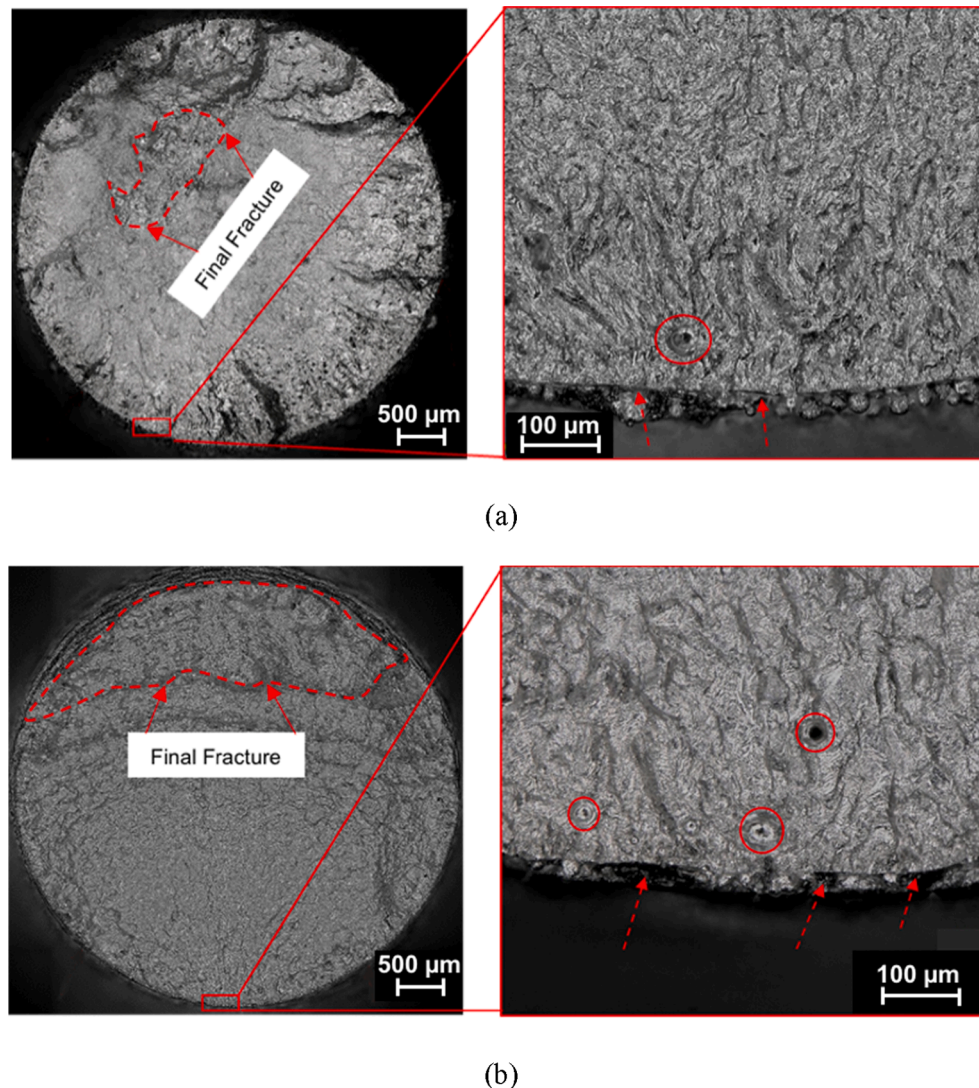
Fracture surfaces of specimens in as-built (AB) surface condition subjected to (a) R-B loading with $2N_f = 250,800$ reversals and (b) axial loading with $2N_f = 44,390$ reversals. Both specimens were fabricated using Machine A, and tested at 325 MPa stress amplitude.
